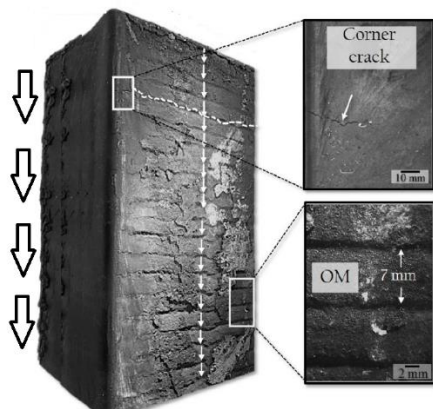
Oscillation marks and cracks formed on a steel billet during continuous casting.
